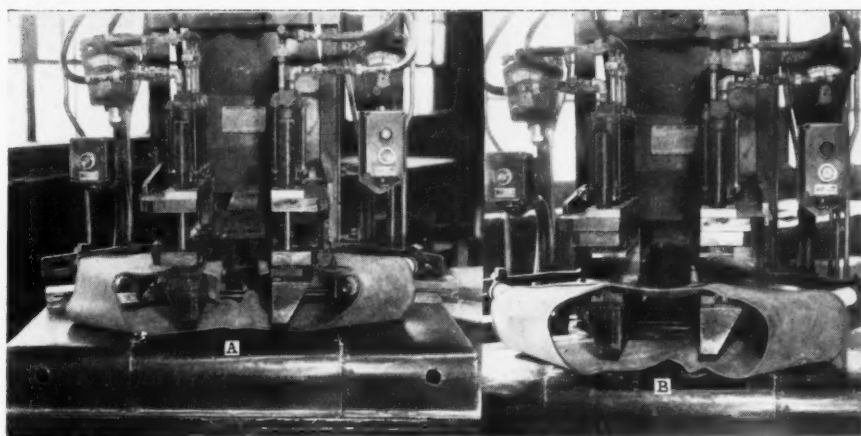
Inner Tube Machine Butt Splicing; (A) Hot Knife Cutting; (B) Finished Splice at End of Machine Operation
